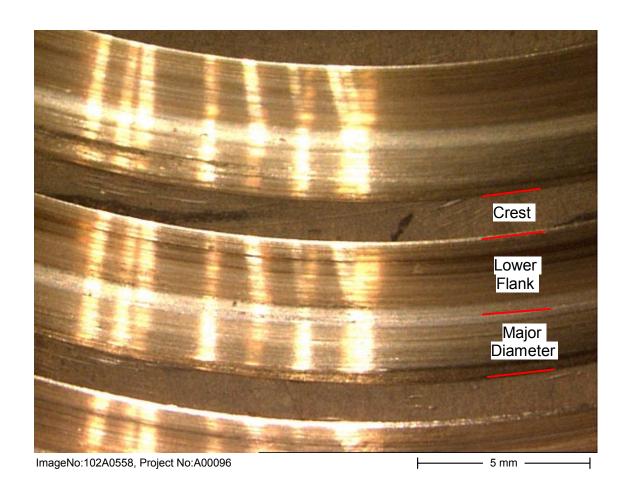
A closer view of the lower thread flanks of the Acme nut. Note the absence of a burr at the thread crest. The major areas of the thread are denoted at right. (Nut s/n DCA110(a))
